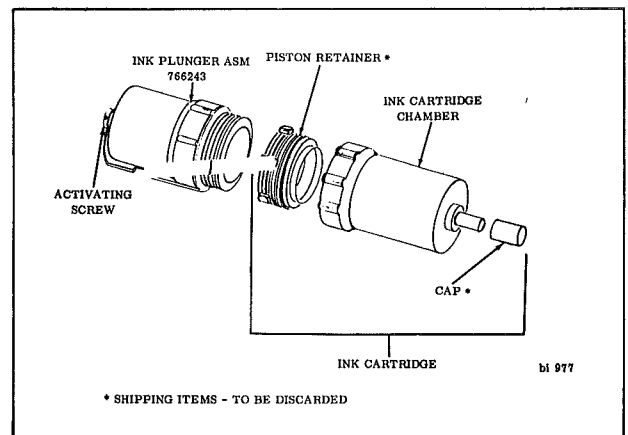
INK CARTRIDGE ASSEMBLY
